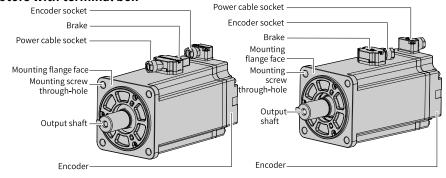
Components of motors with terminal box (left: front outlet; right: rear outlet)
